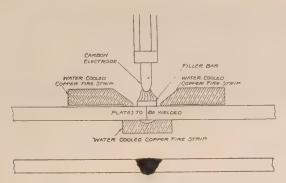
Drawing of Essential Parts used in Carbon Arc Welding
